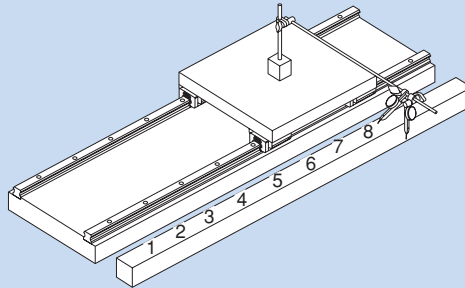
Running Accuracy After the LM Guide Is Mounted
